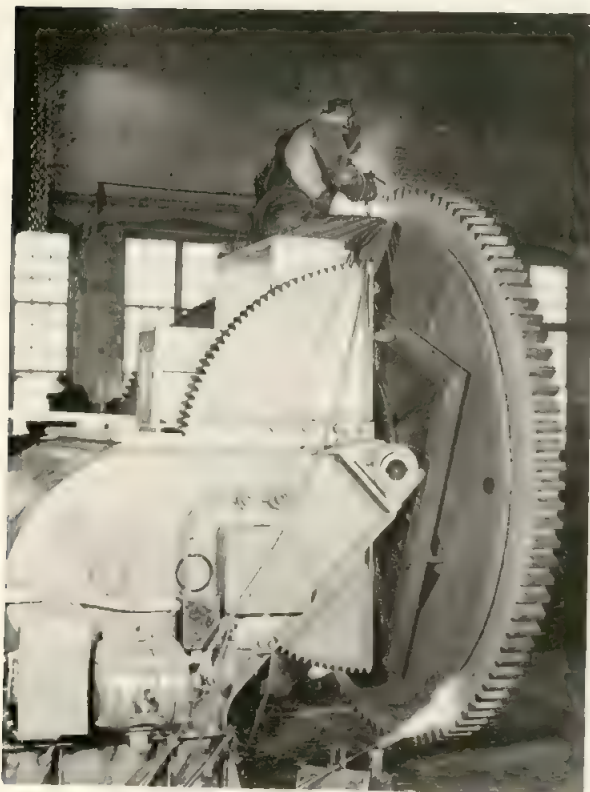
Large weldment on bigger positioner.
